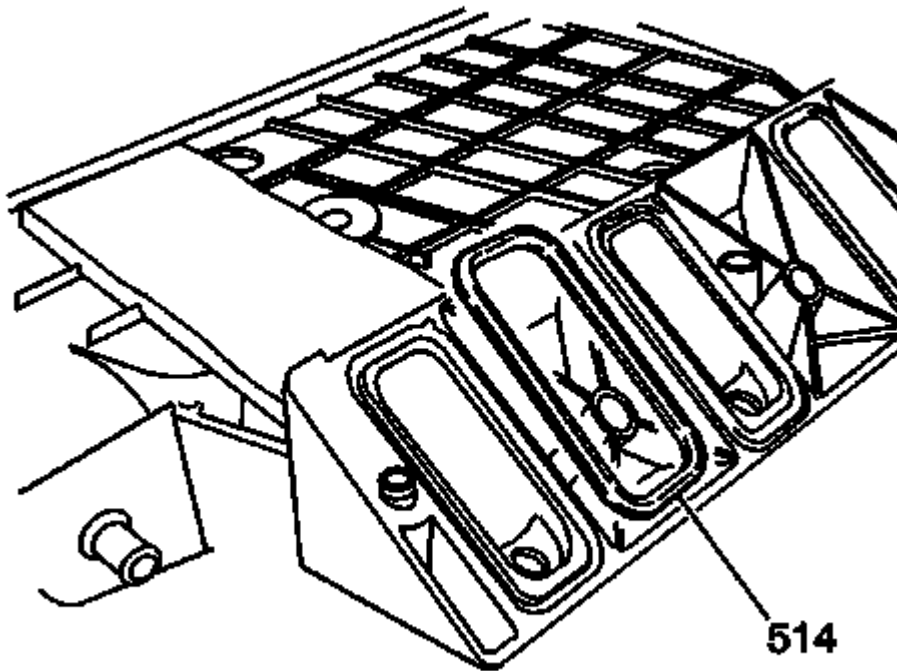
View Of Intake Manifold-To-Cylinder Head Gaskets
